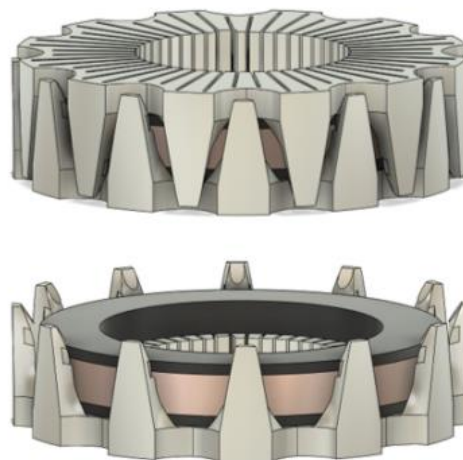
Stator half shells of the transverse flux machine shown by Kresse et al. (51) that are additively manufactured. Reproduced from (51).
